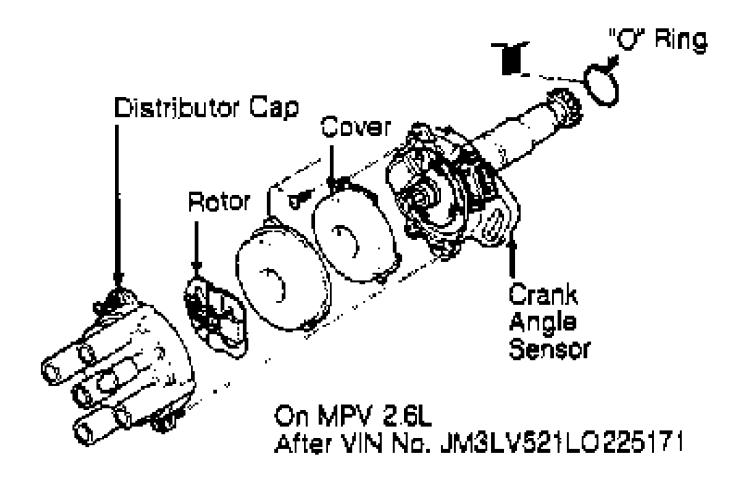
Exploded View of Distributor (B2200 PFI, B2600i & MPV 2.6L) Courtesy of Mazda Motors Corp.
